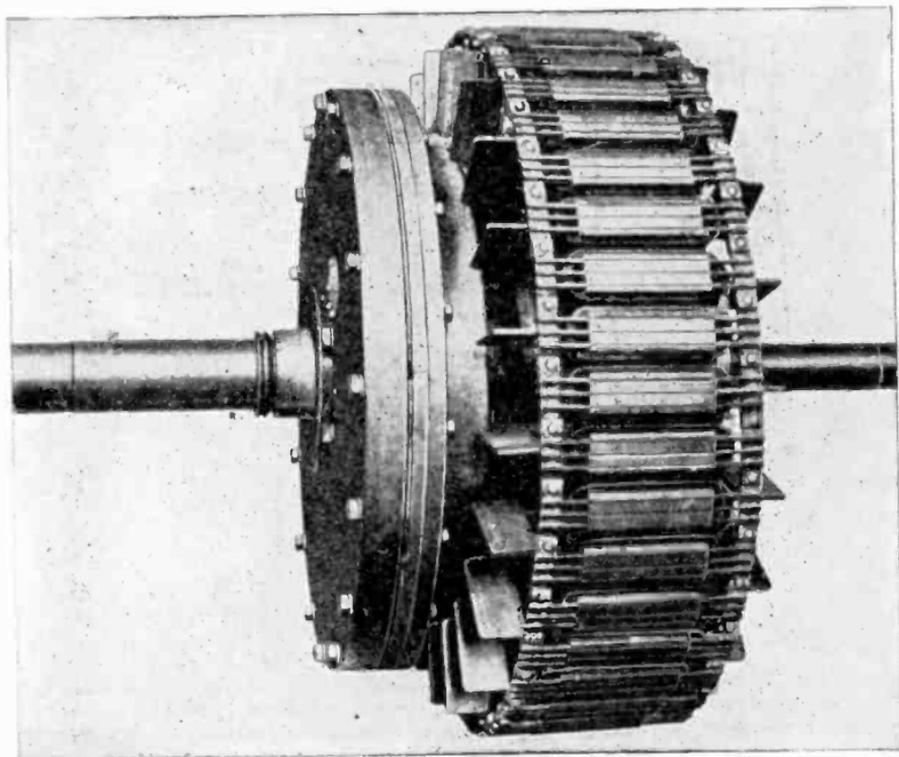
Rotor of Westinghouse magnetic clutch type synchronous motor showing magnetic clutch, welded damper squirrel cage, field, fan, etc.
